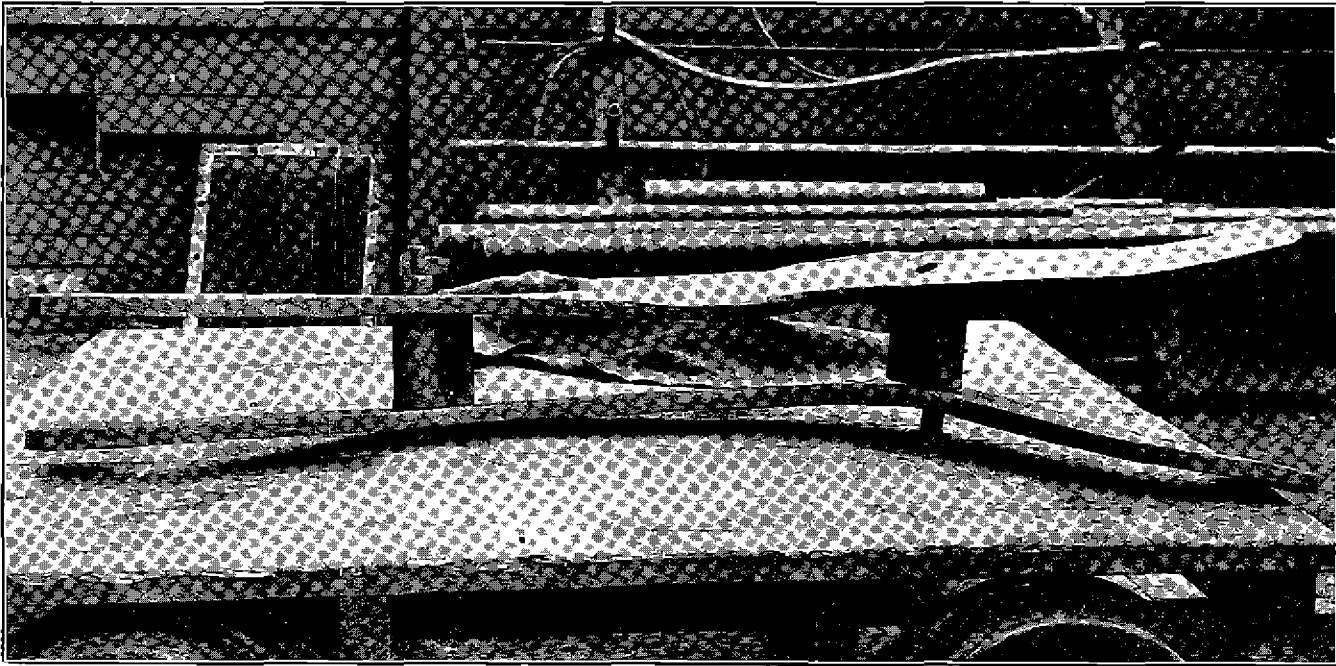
Right engine truck equalizer bars Bolt carrying forward spring hanger broken Forward ends of equalizer bars spread and twisted
